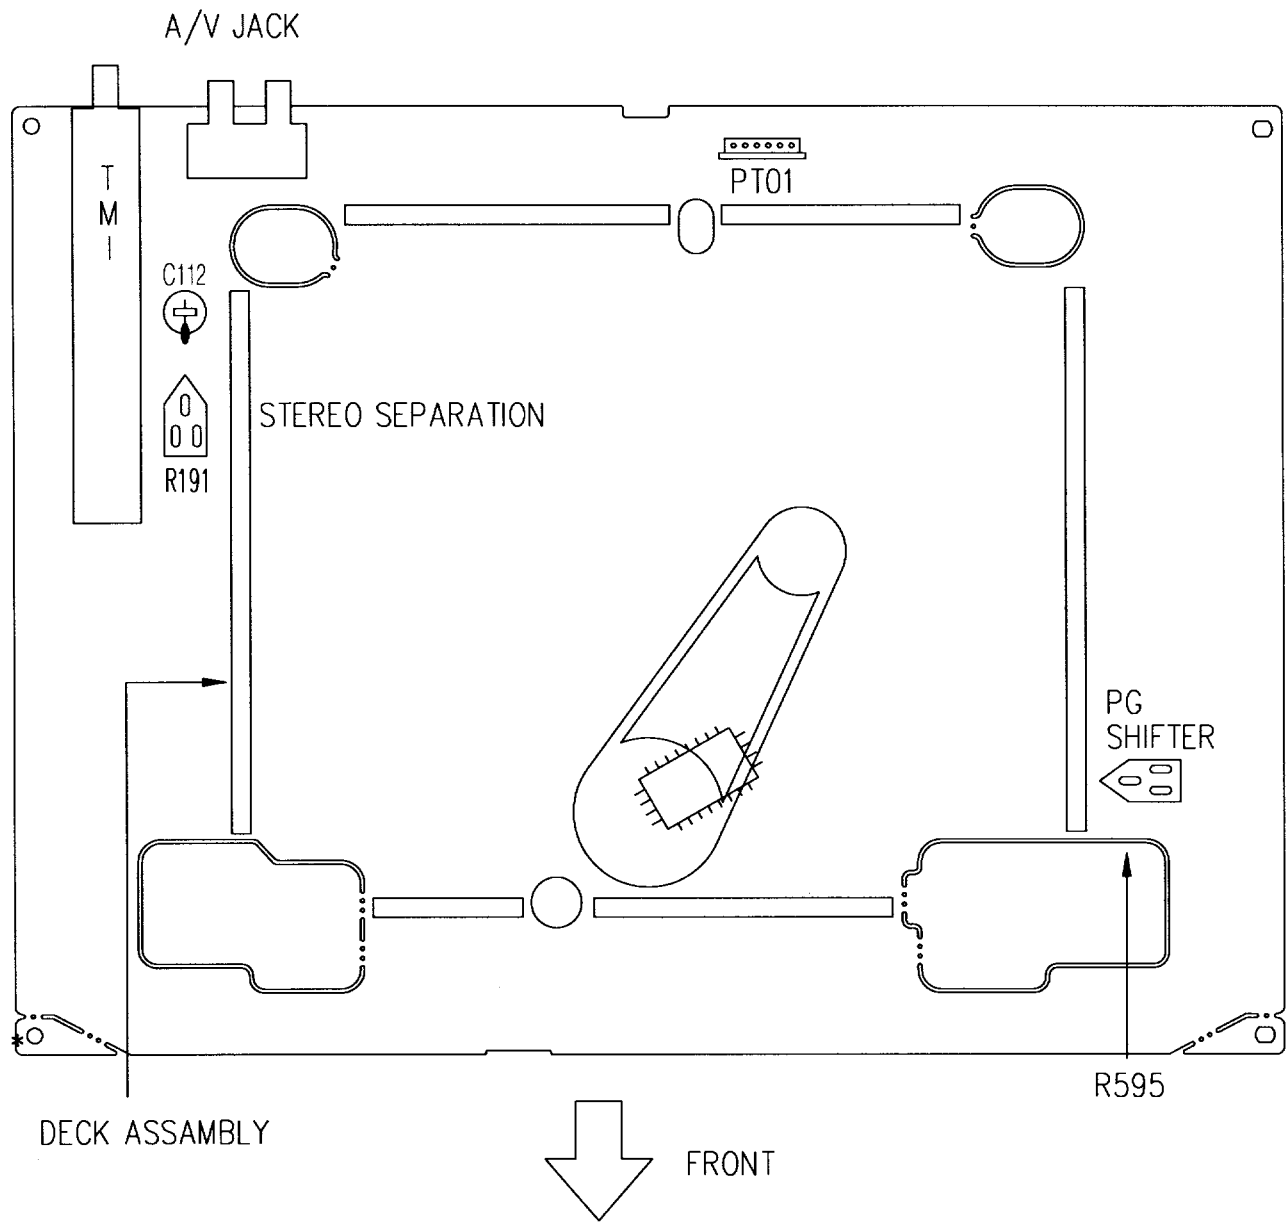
Main Board Test Point/Control Location Guide (Component)
